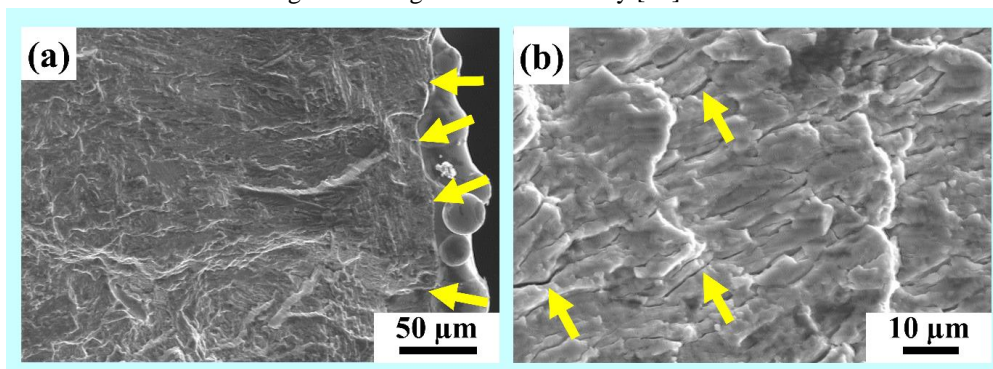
Fatigue crack initiation at a surface defect and partially melted particles (a). Secondary cracking in high temperature fatigue fracture (b).
